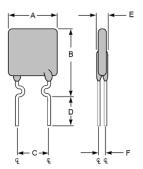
RG250-16 Lead Size: 24AWG Ø 0.51 mm Diameter
